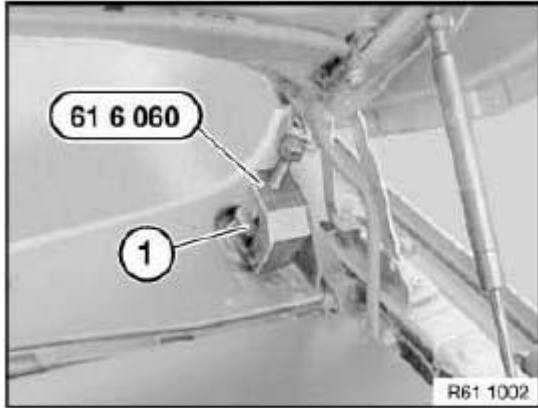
Identifying Special Tool (61 6 060) On Adjusting Disk
